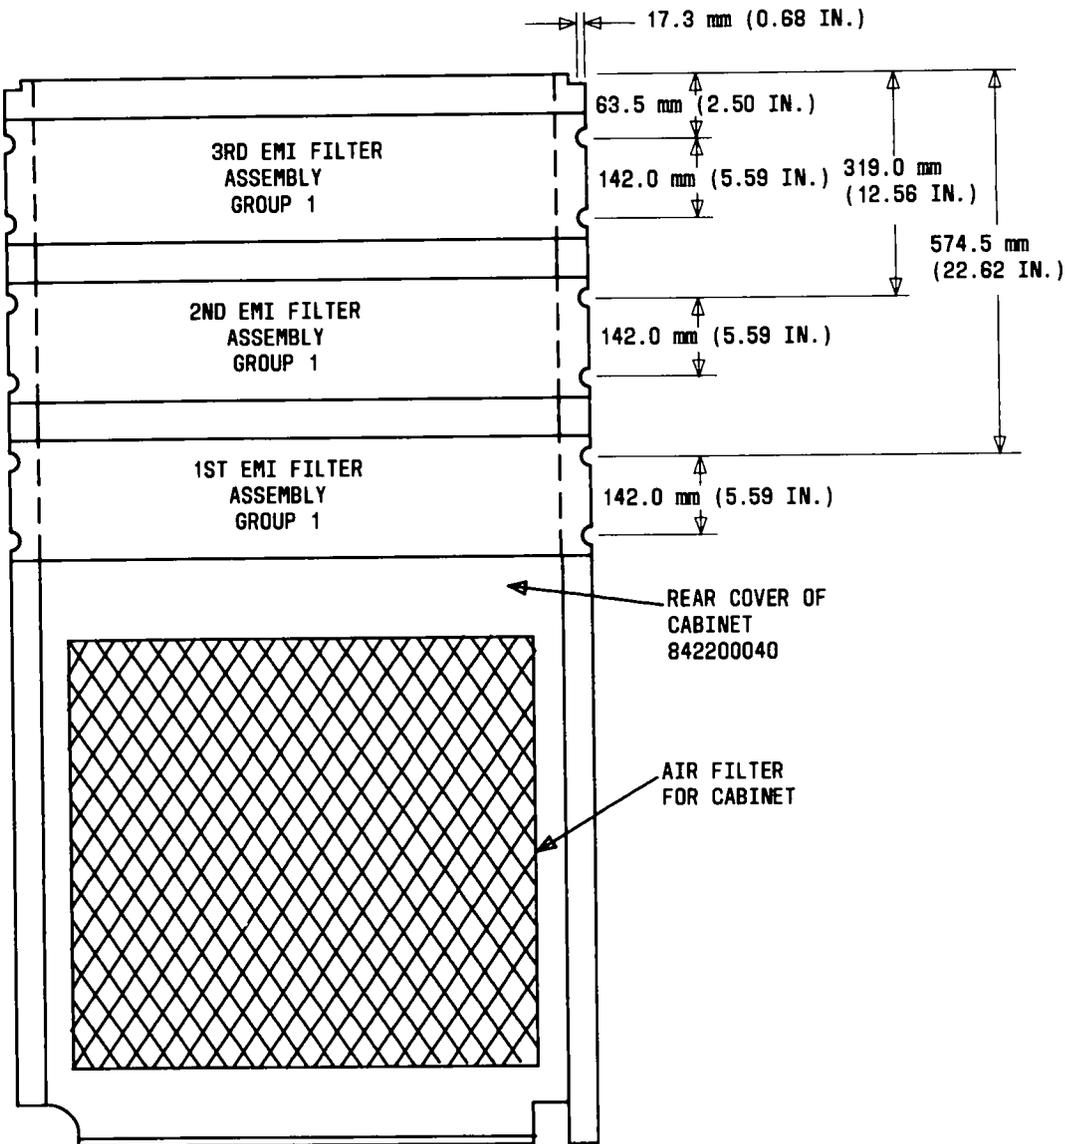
EMI Filter Assemblies Mounted on Rear Panel of the DIMENSION PBX Cabinet
